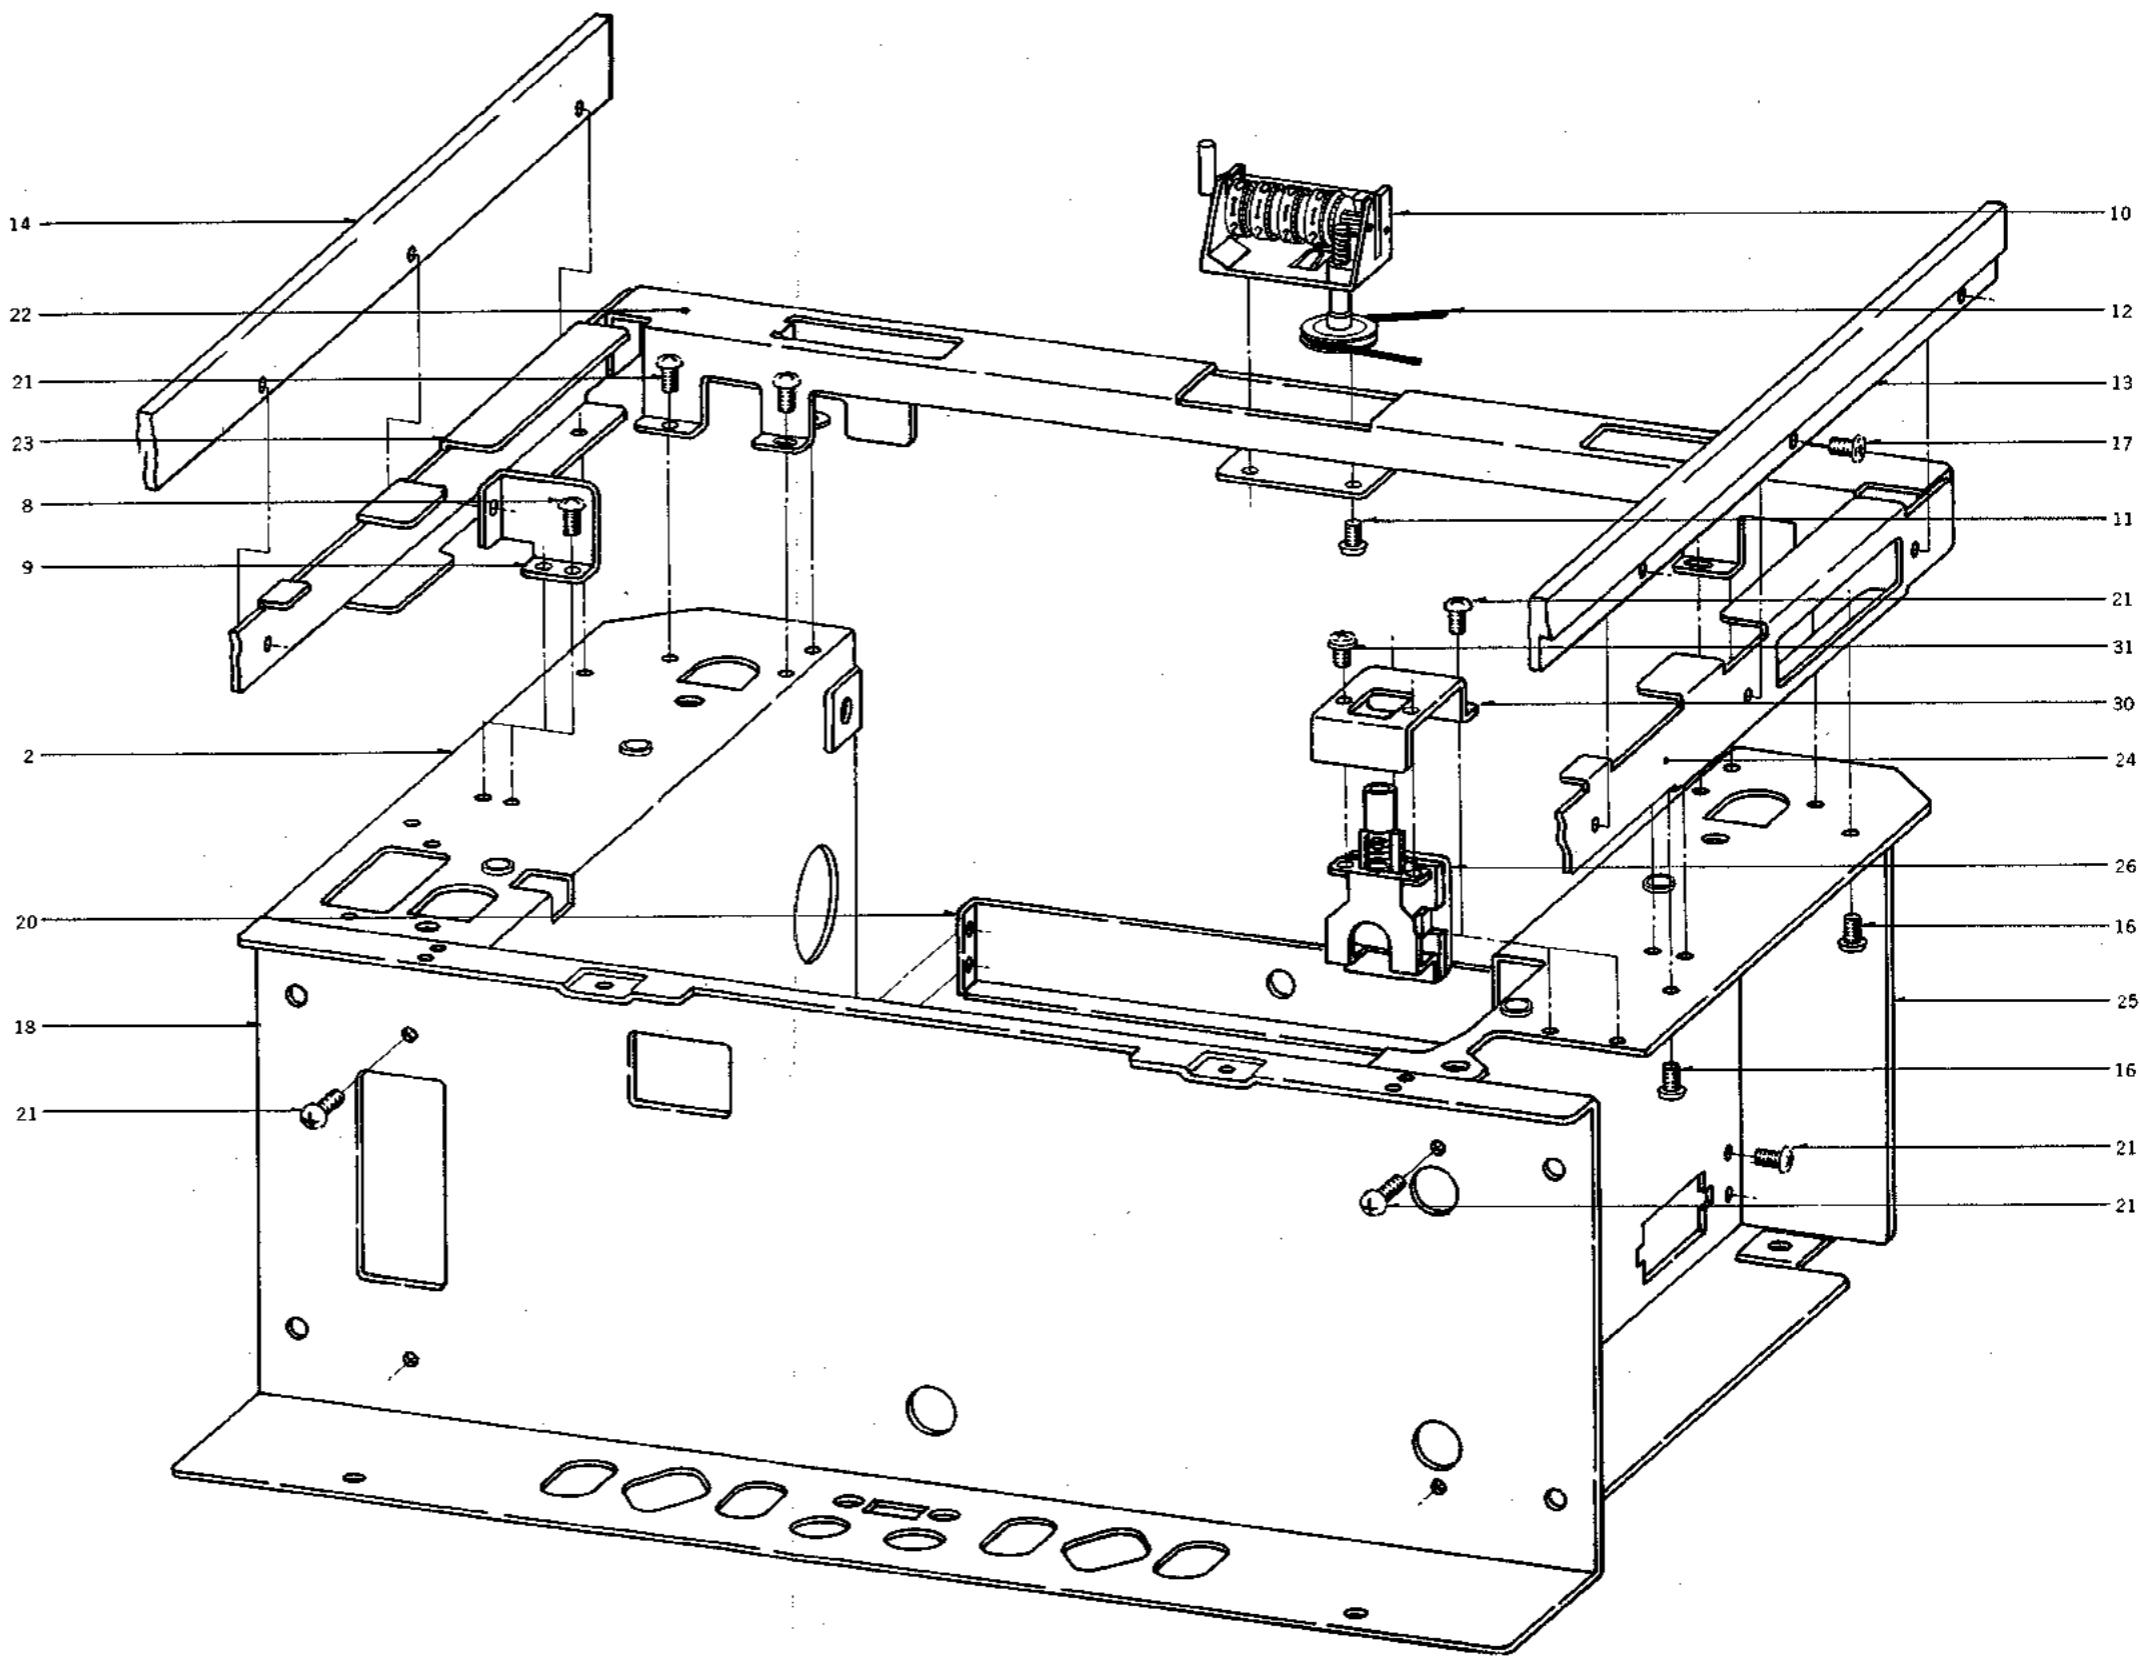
ILLUSTRATION OF MECHANISM ASSEMBLY BLOCK (II)
